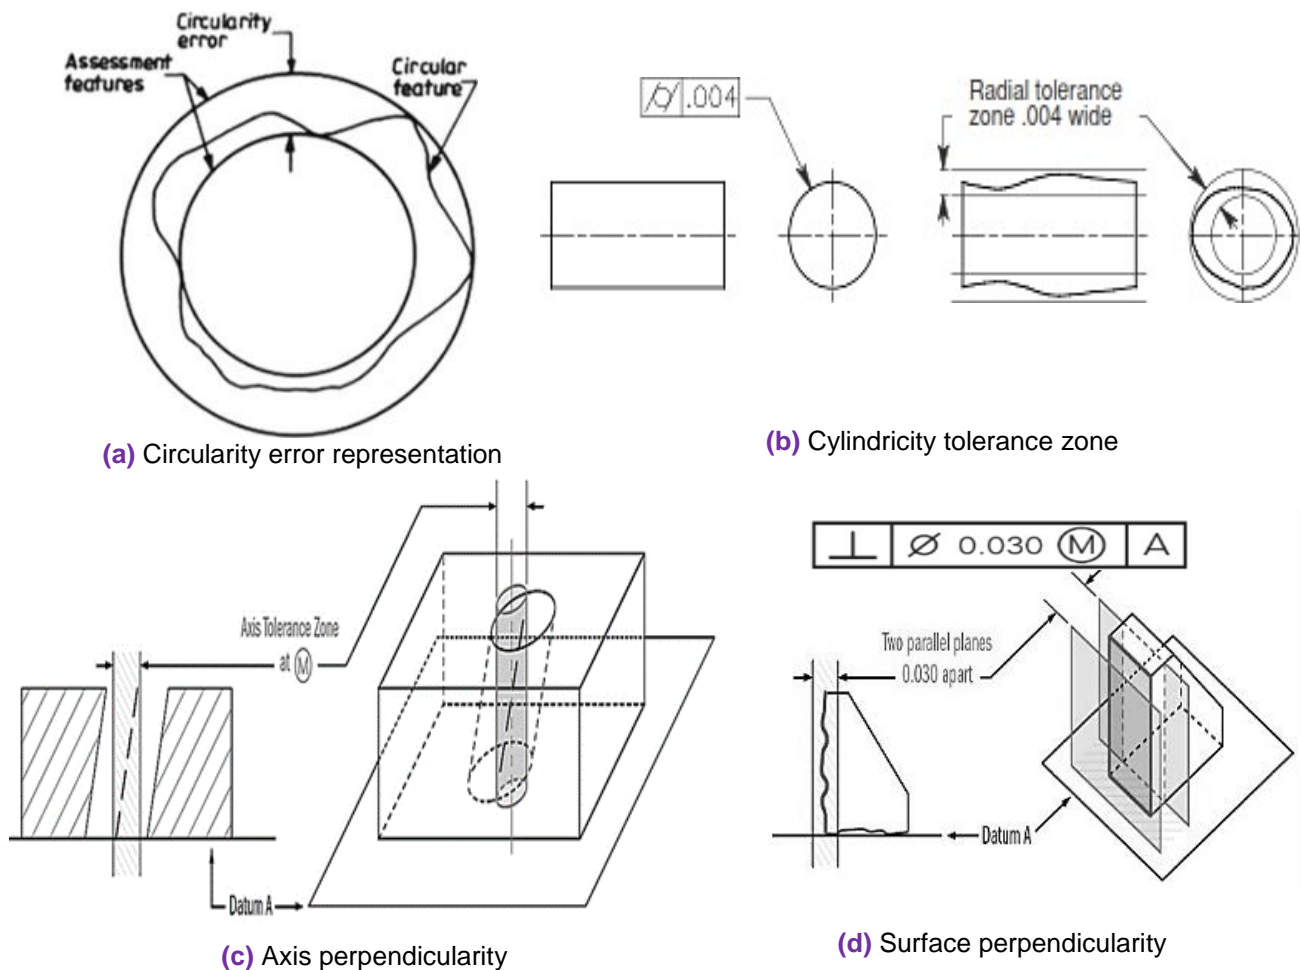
Circularity, Cylindricity and Perpendicularity tolerance zone [25].
